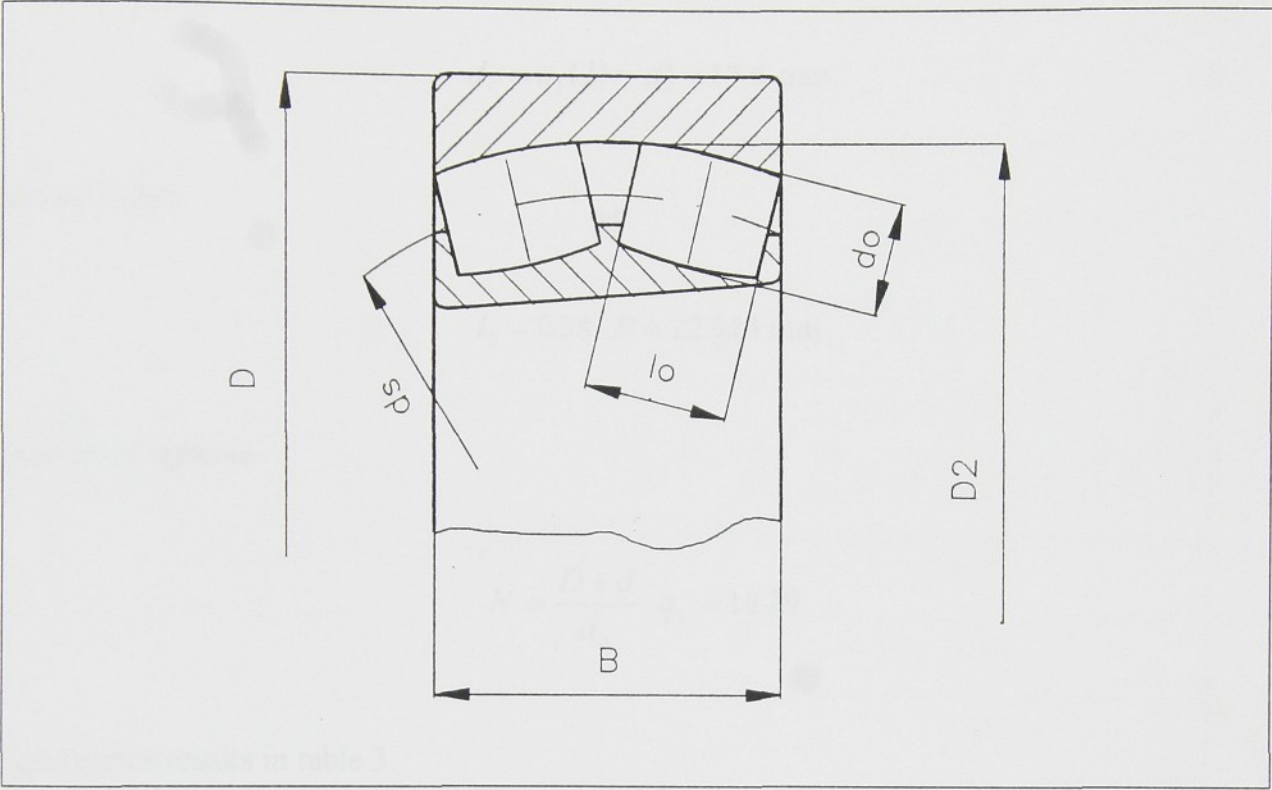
Dimensions of spherical roller bearing Type 232 20
